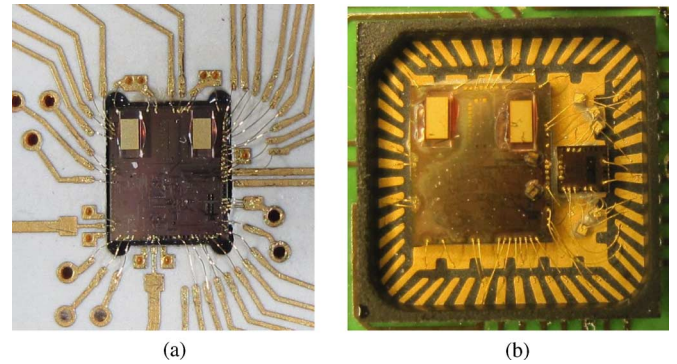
Comparison of SiGe transceiver chip mounting. (a) Bonded in PCB, (b) Mounted in QFN package.
